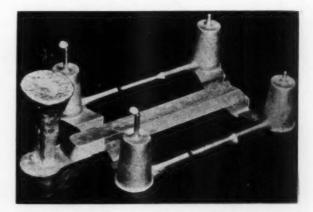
Sand casting to produce two ½ in. diam castto-size tensile specimens.
